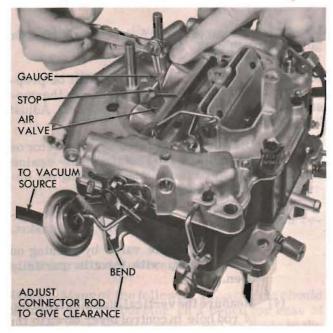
Adjusting Choke Diaphragm Connector Rod (Secondary Air Valve Control)
